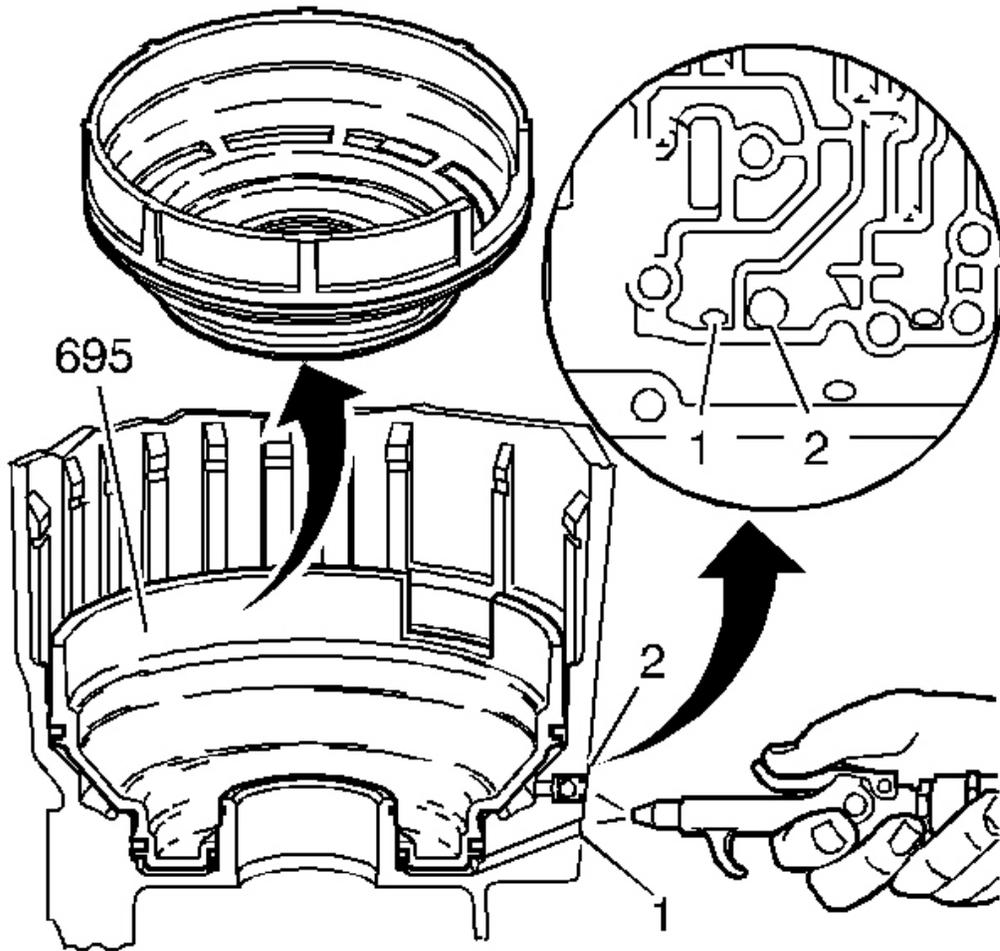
Blowing Compressed Air Into Case Passage To Remove Low & Reverse Clutch Piston
